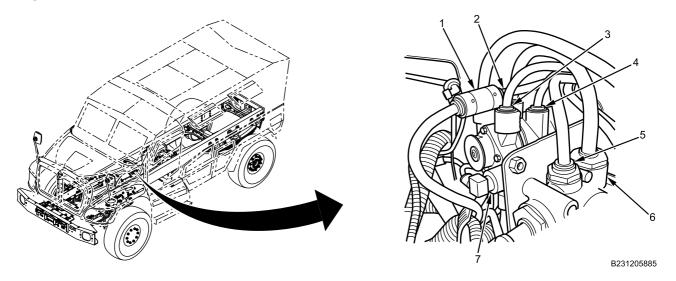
Dual Brake Valve and Tractor Protection Valve Upper Air Lines.
